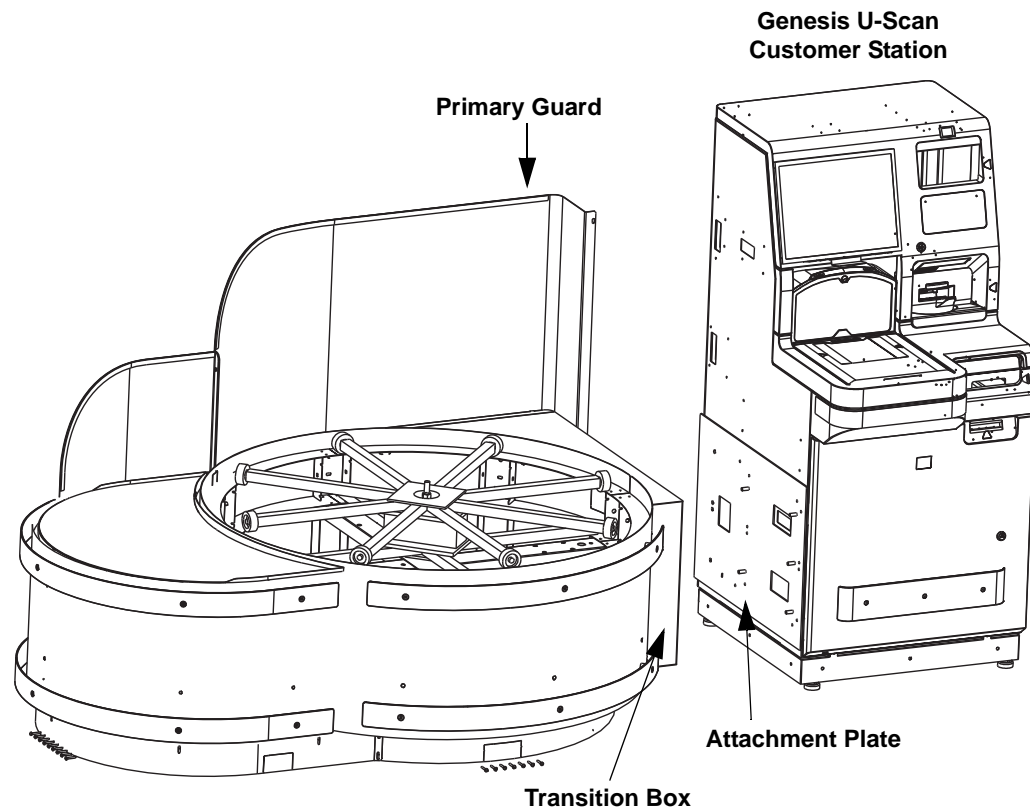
Genesis Customer Station and Carousel (platter/bag racks removed)
